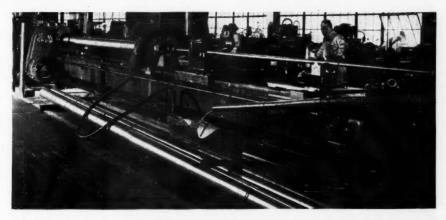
The 2%-inch hole through the axis of the drill collar is drilled with the aid of a LeBlond gun drill. The operation takes approximately eight hours.
